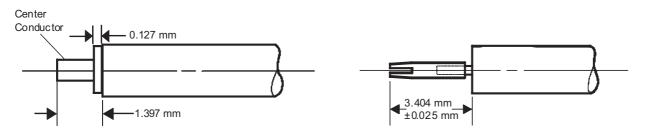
V101F-R Cable Preparation and Center Pin Assembly
